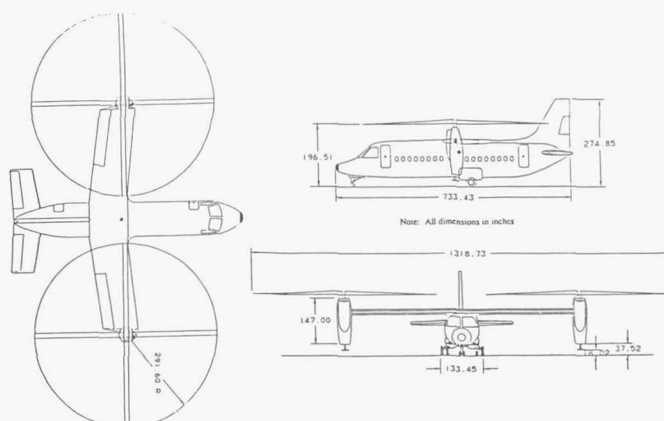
Transit Tilt Rotor (all dimensions in inches)
